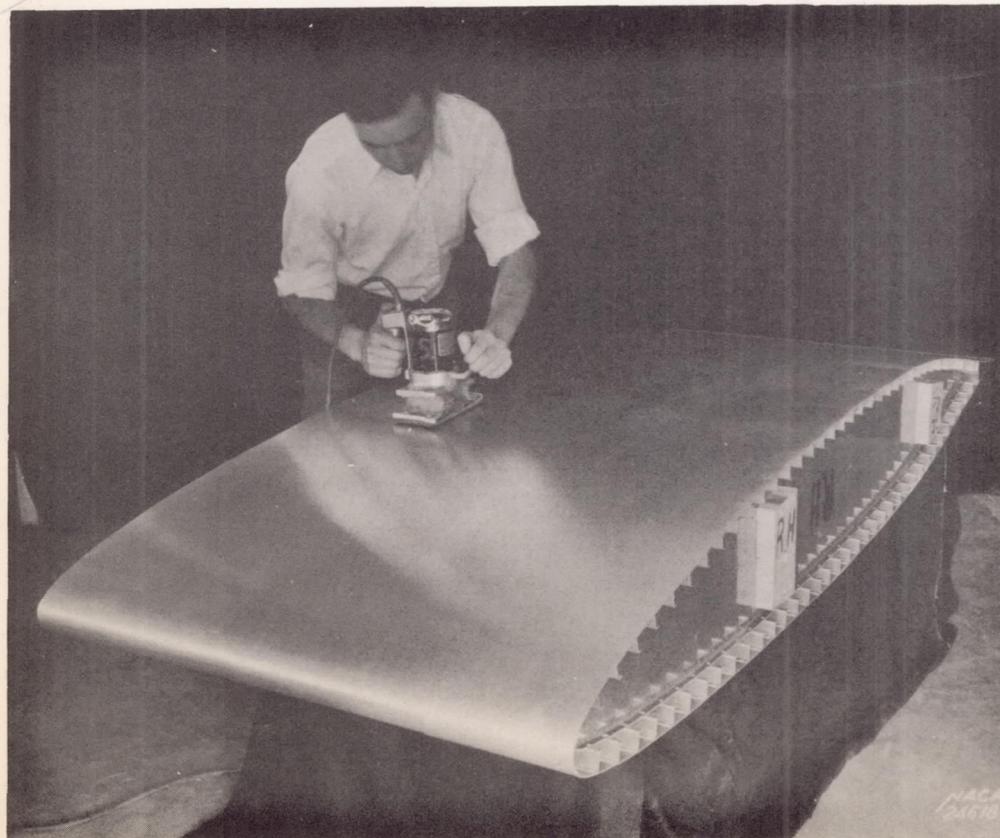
Vibrating-surfacing tool used to finish the rivet heads after the protruding portion has been removed.
